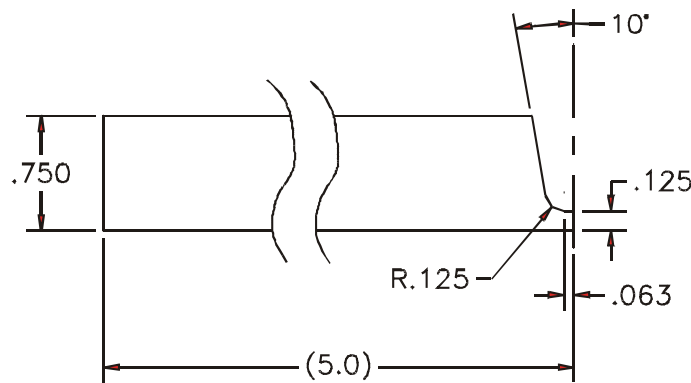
Fusion weld joint profile. Dimensions in inches
